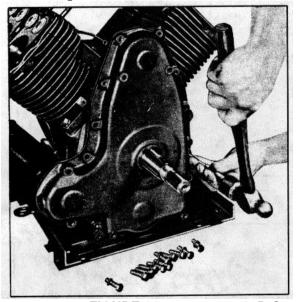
CIn reassembly; inspect crankshaft oil seal and replace ifnecessary.Be sure that oil sling is in place oncrankshaft, then mount gear cover using a new flangegasket.Tap the two dowel pins in place and mountcapscrews.Tighten screws 14 to 18 ft.Ibs. torque.
